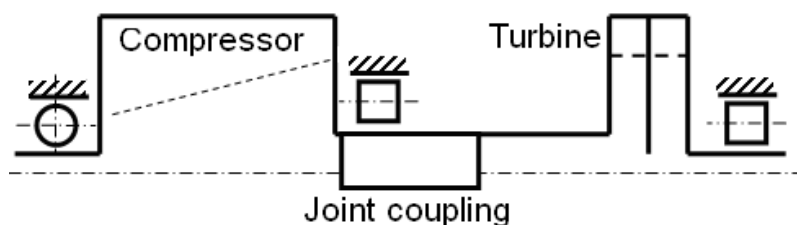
Three-support rotor with radial-thrust bearing placed before compressor
